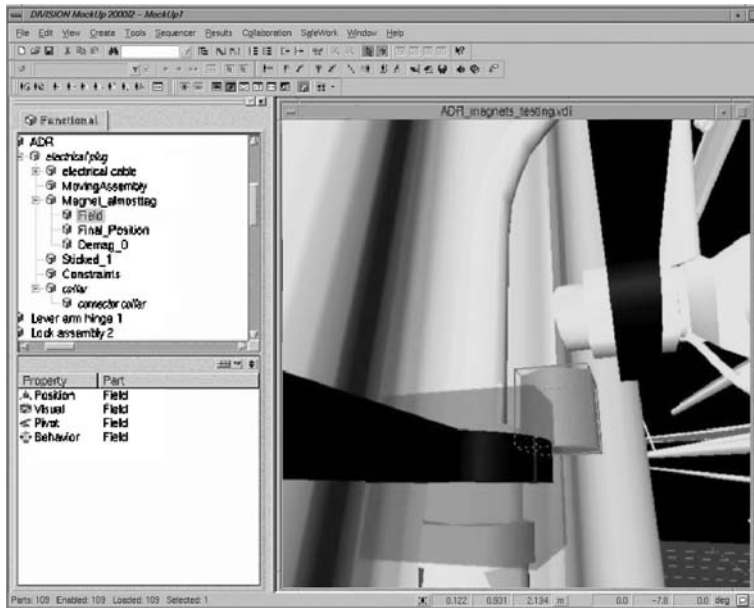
Visualization of the assembly support mechanism (magnet concept)
